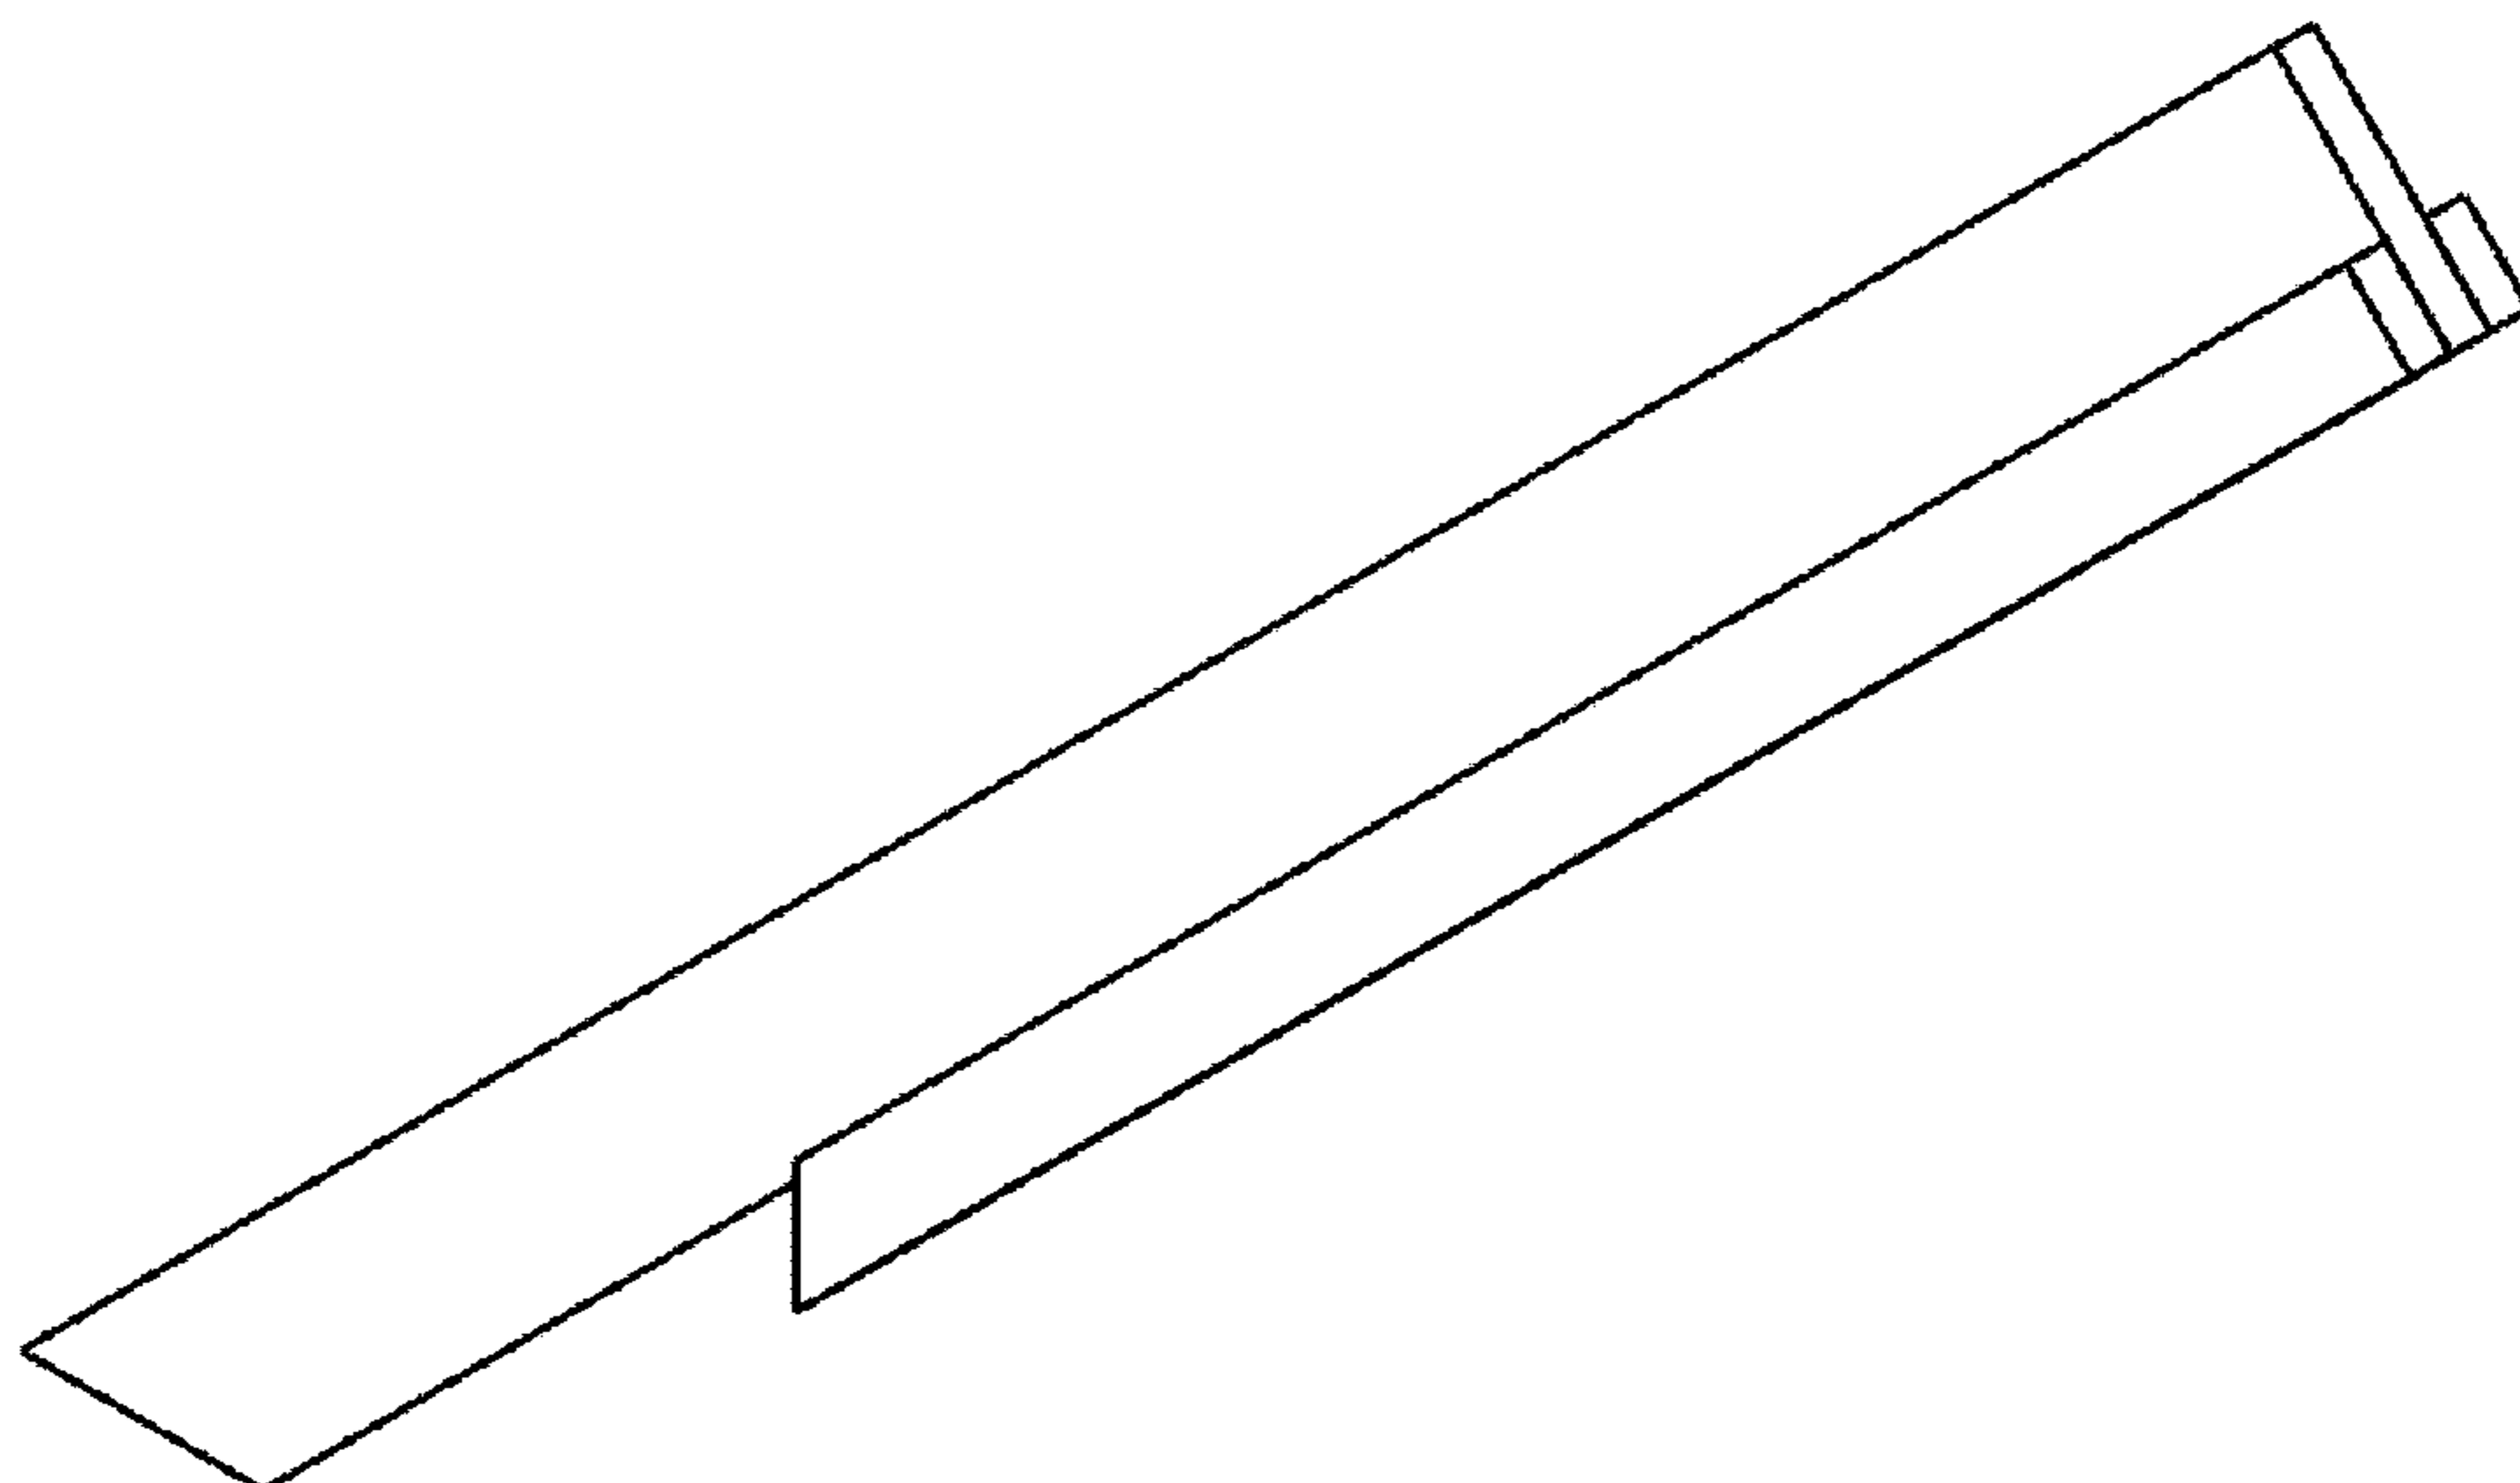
is a perspective view of a framing assembly, showing my new design;
